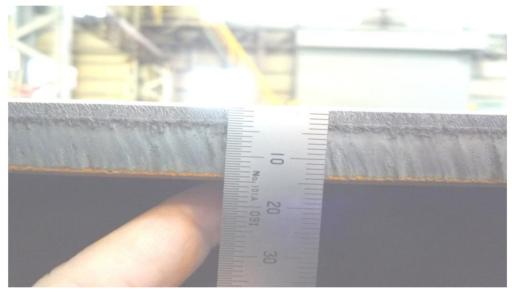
Cross section of Cladded plate showing CRA and Carbon Steel layers
